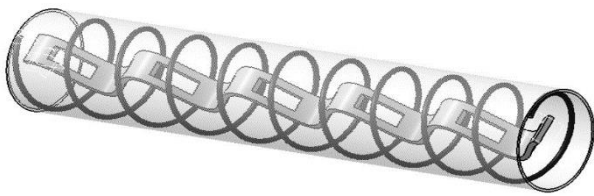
3D view of Combined Wire Coil and Wavy Strip
